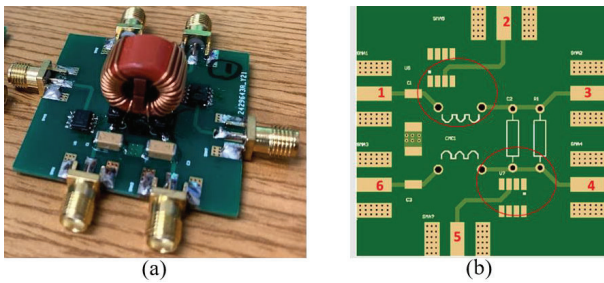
EMI Filter board: (a) complete PCB, (b) Layout.
